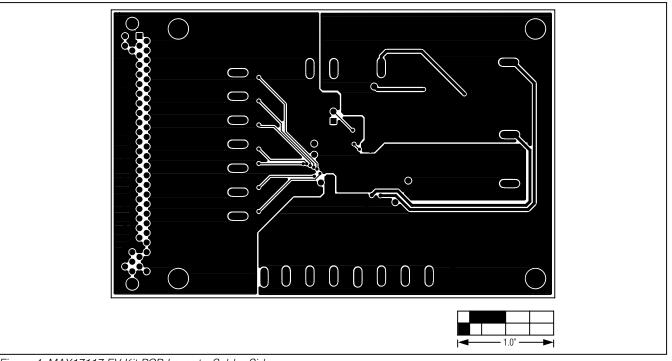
MAX17117 EV Kit PCB Layout—Solder Side
